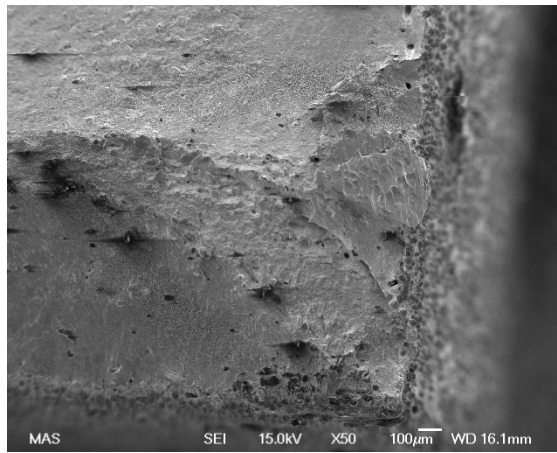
86 B10 HT1 x50 Fracture Surface, UTS 593 MPa
